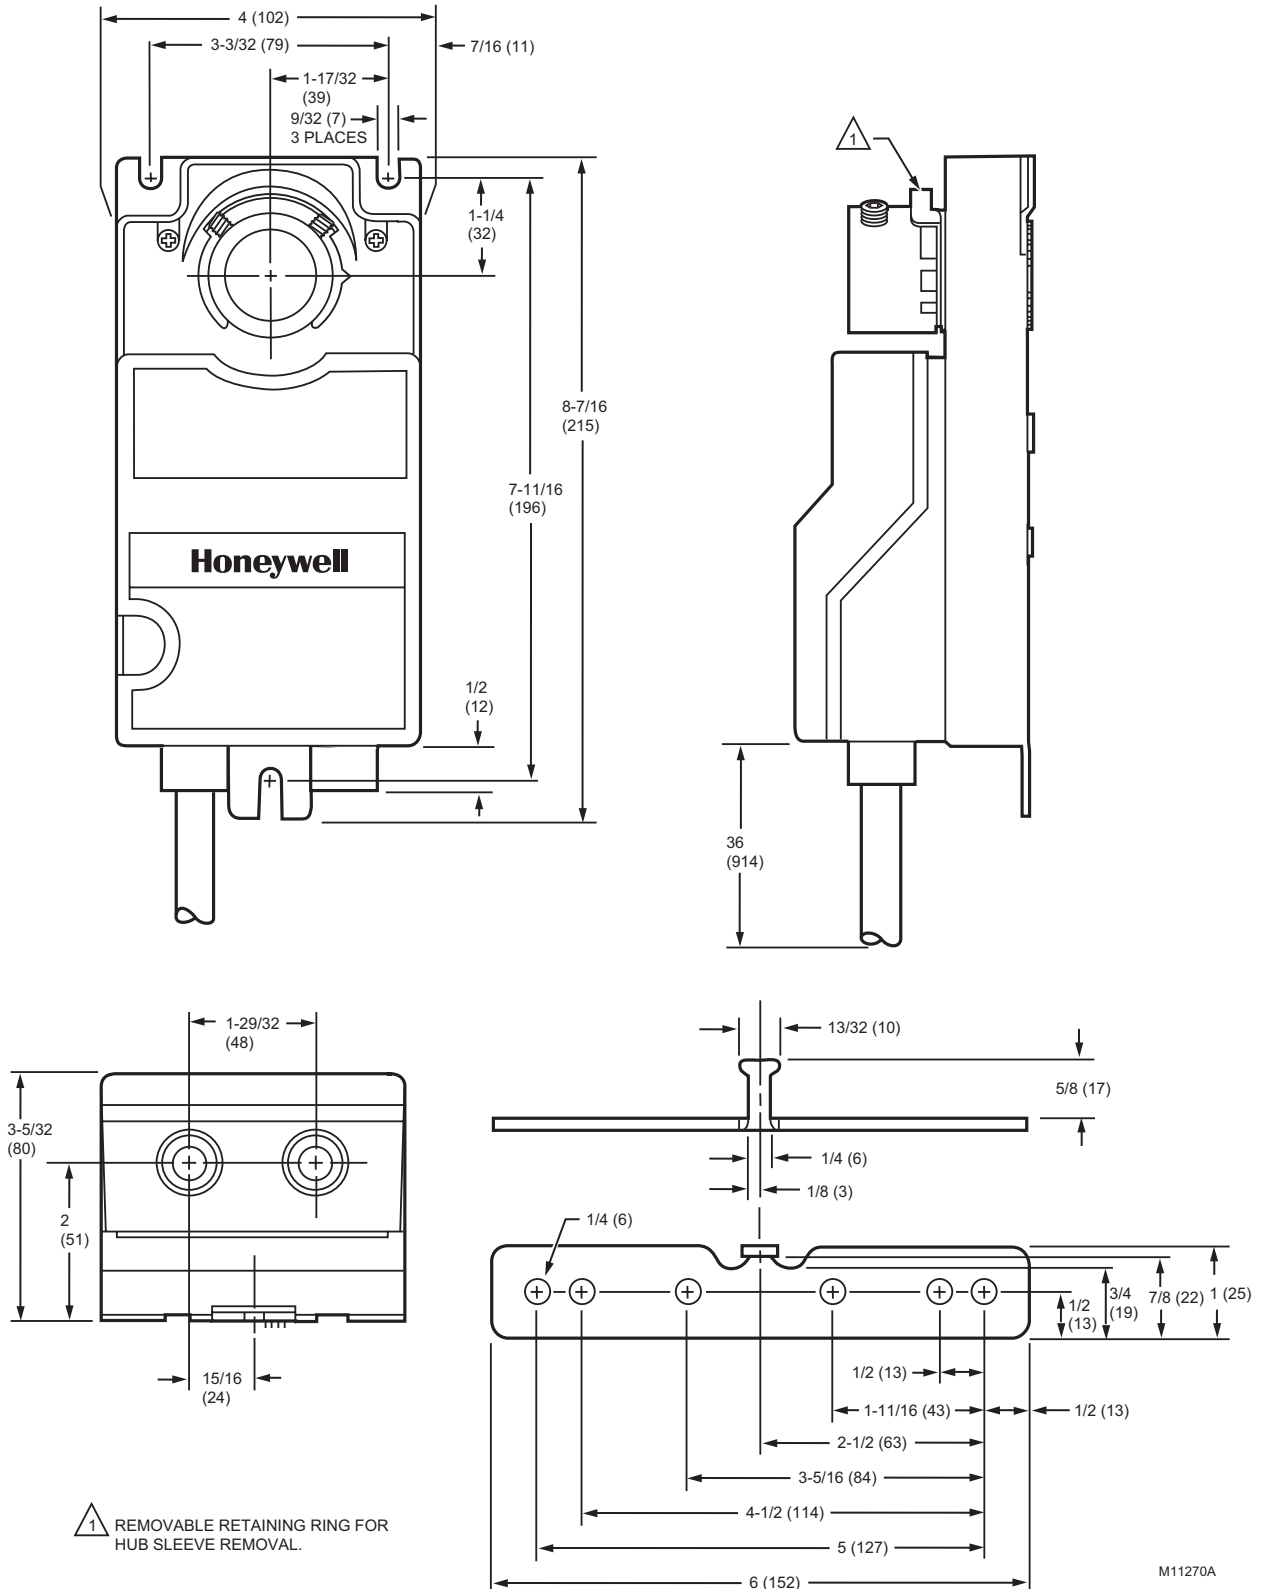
Approximate dimensions of ML6194/ML6294 Non-Spring Return DCA and mounting bracket in in. (mm).
